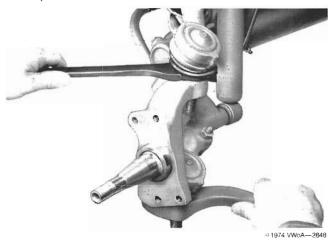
Eccentric camber adjusting bushing being turned. (Wheel and brake removed for clarity.)
